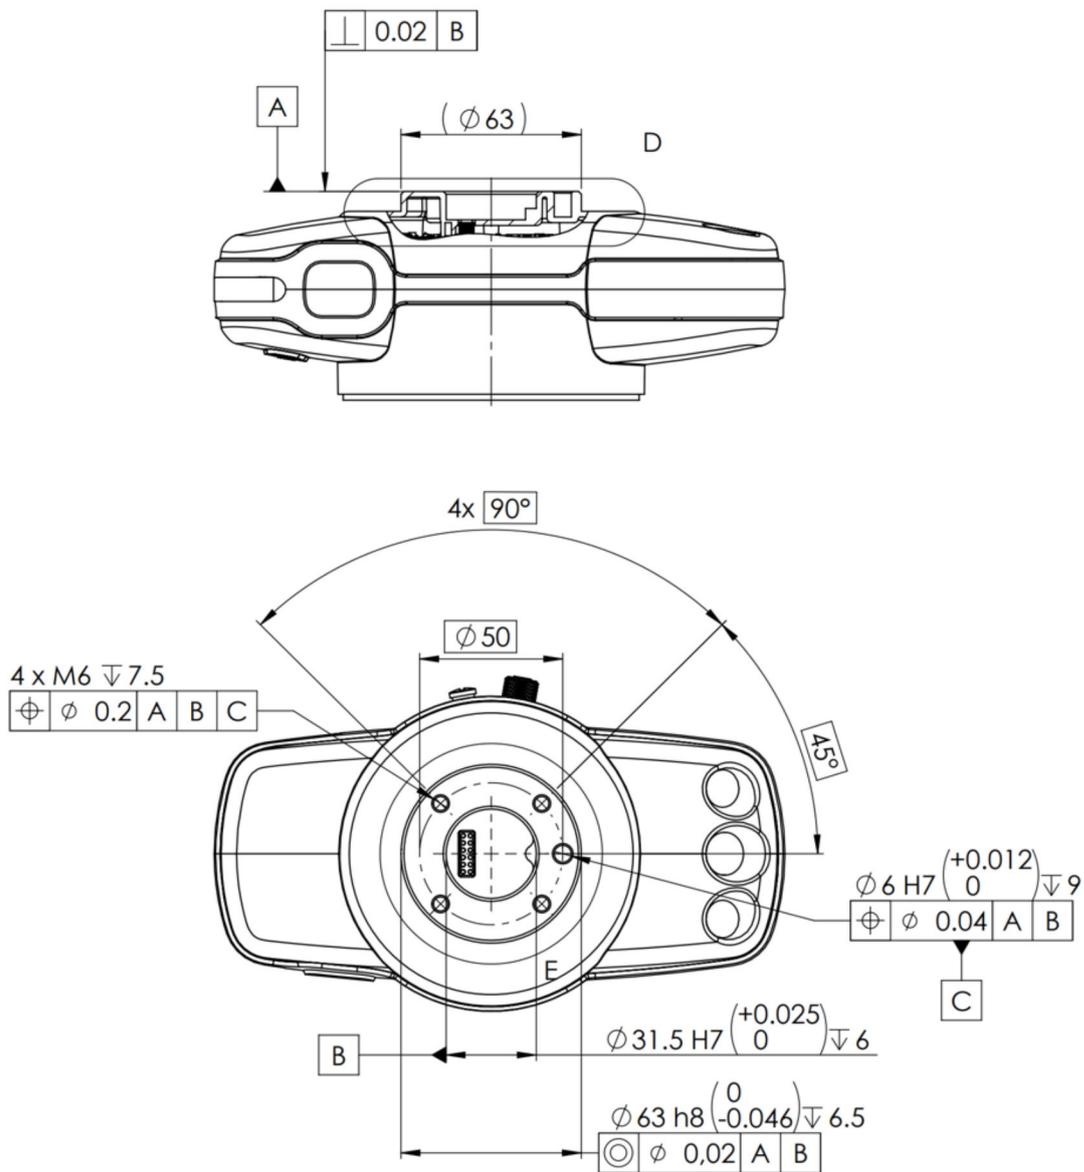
Dimensions of mechanical interface on the media flange, view 1 (dimensions in mm)
